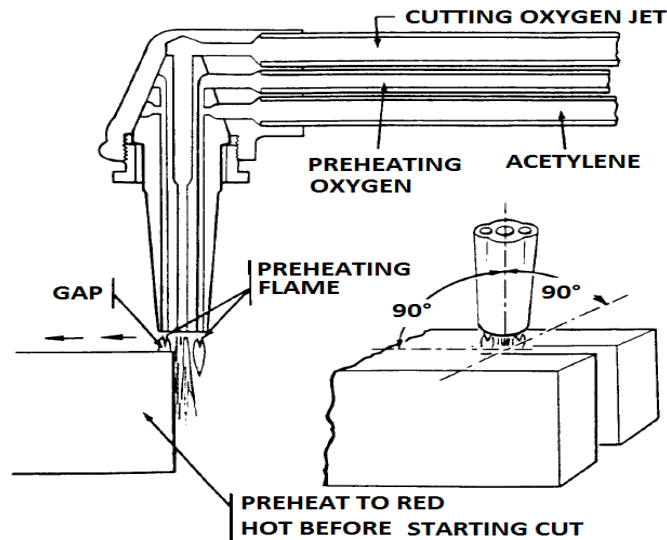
Reprising the starring a cut with a cutting torch [Mewelding].
